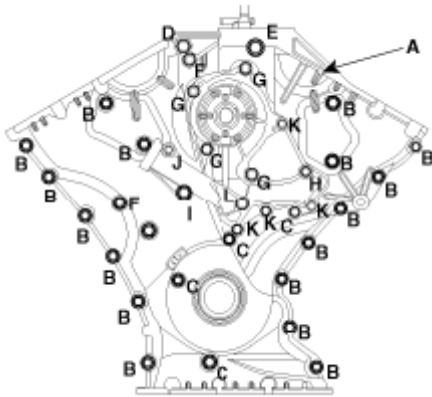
Identifying Cylinder Block Dowel Pins And Holes On Timing Chain Cover
